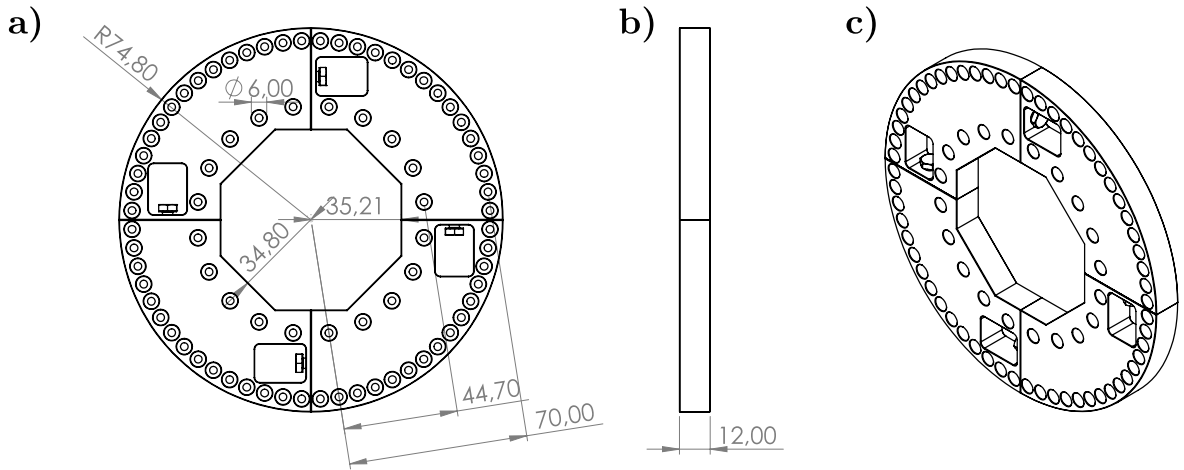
CAD drawing of the holder for the permanent magnets. The holder consists of four equal parts fabricated from aluminium. There are cylindrical depressions with diameters of 6 mm in two circular patterns with radius $r_1 = 70.00$ mm and $r_2 = 44.70$ mm. a) Front view. b) Side view. c) Isometric projection.
